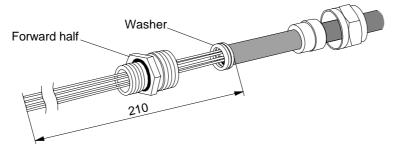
Sliding the smallest washer and part of the fitting onto the cable.
